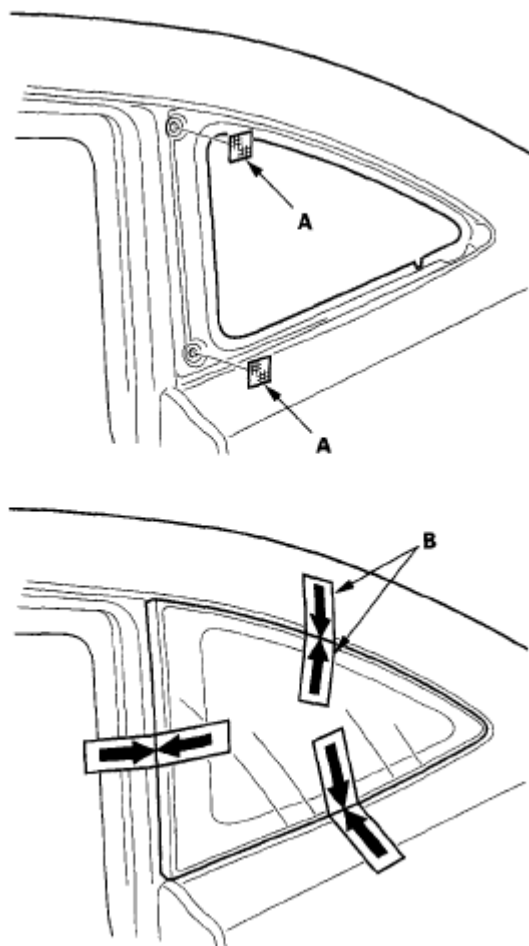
Sealing Body Holes With Pieces Of Urethane Tape
